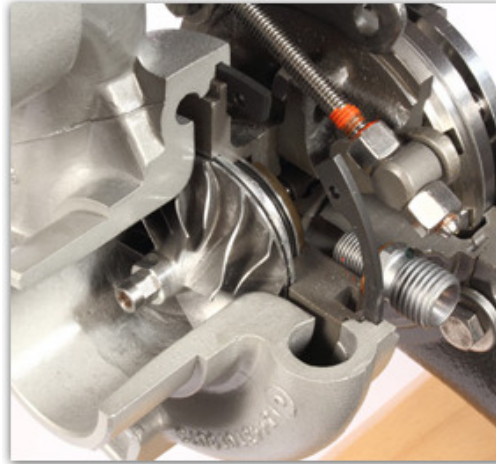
Turbocharger component manufactured by GKN Sinter Metals ²⁰
